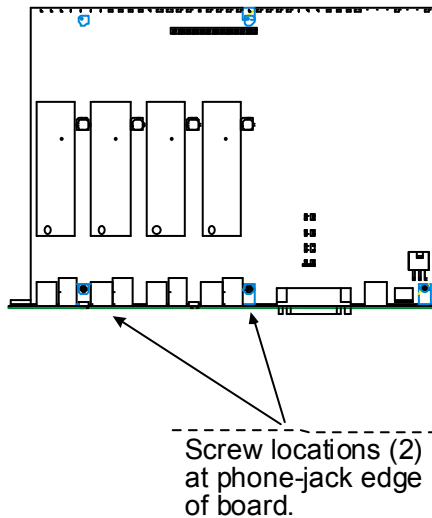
Screws to be removed and replaced with standoffs (phone-jack edge of board; top view)
